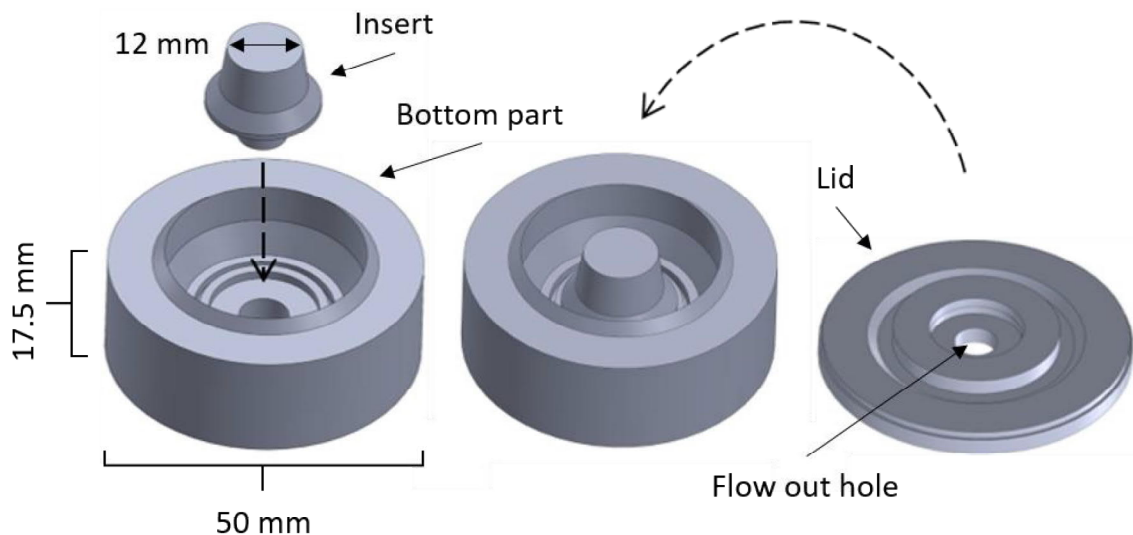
Parts of the mold. Left: assembly of the bottom mold and insert, center: assembled bottom mold and right: lid. The device is formed upside down in the mold: the insert forms the cell culture chamber, and the lid forms the vacuum chamber and the surfaces that are bonded to the PDMS film.
